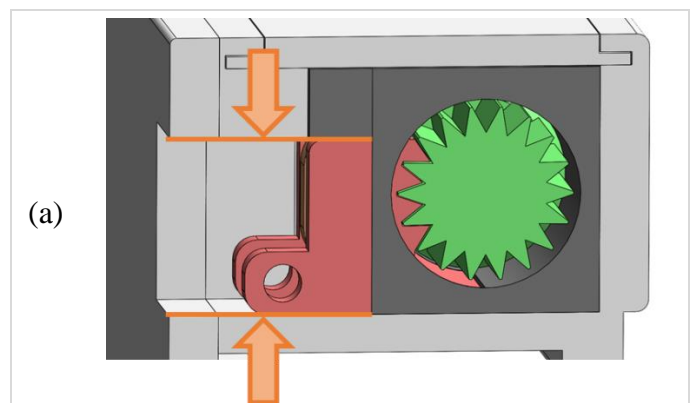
Assembly of the New Mechanism on the Shoulder Support
